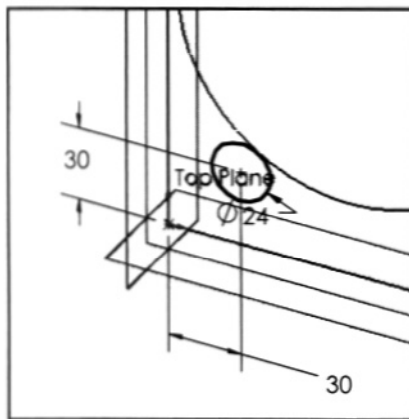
To Fully Define the Hole sketch (centerpoint), we must add locating dimensions.
